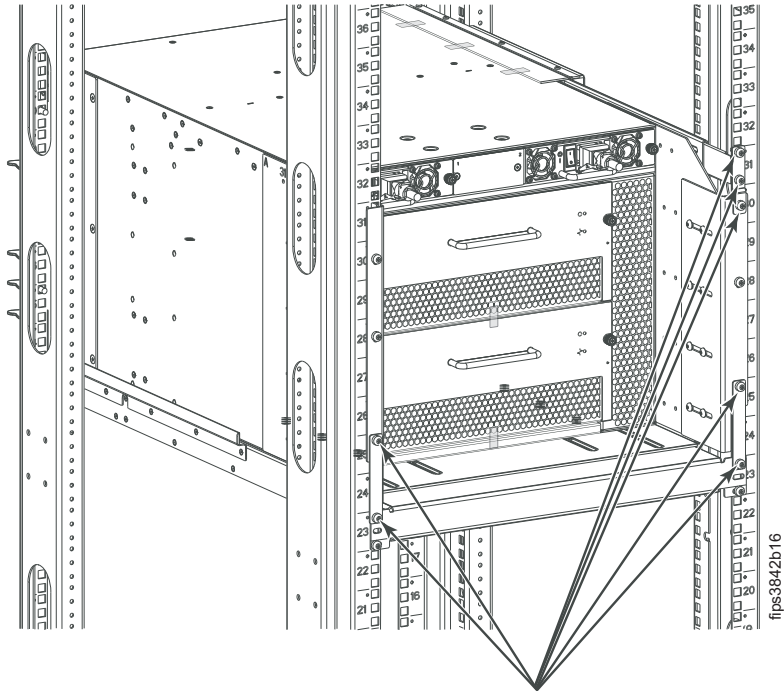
2499-416 rackmount screw removal (non-port side view)
